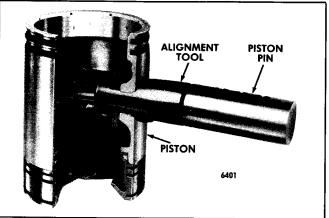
Installing Piston Pin using Alignment Tool J 35619
